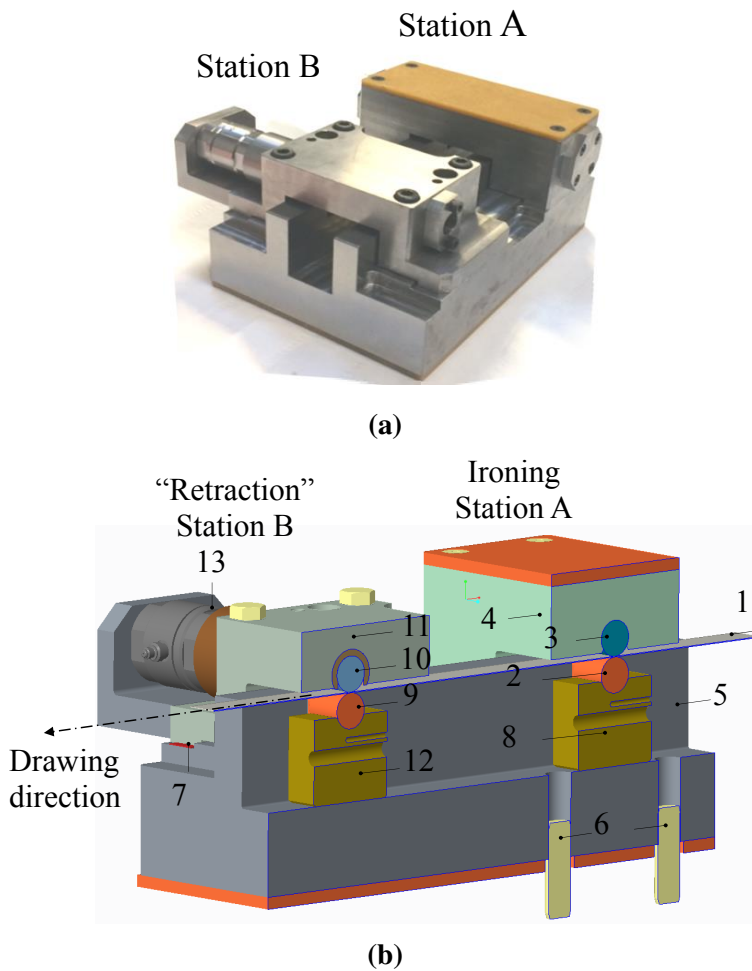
(a) Photograph of the SRT tool design and (b) schematical cross-sectional view of its main components.
